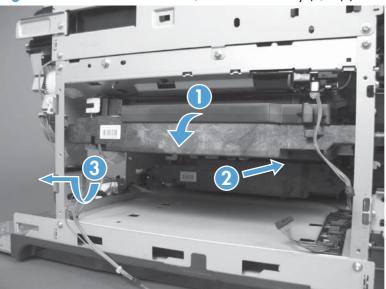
Remove the laser/scanner assembly (Y/M) (11 of 12)
